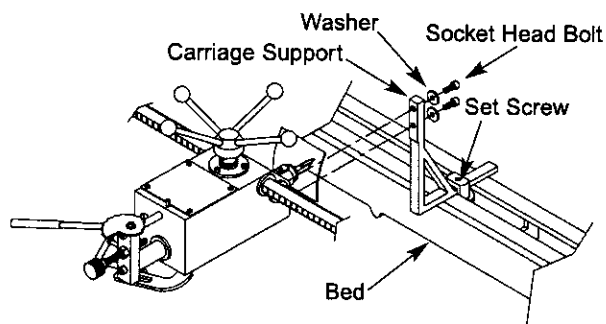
Attach Carriage Support to Carriage (Model 24951)
